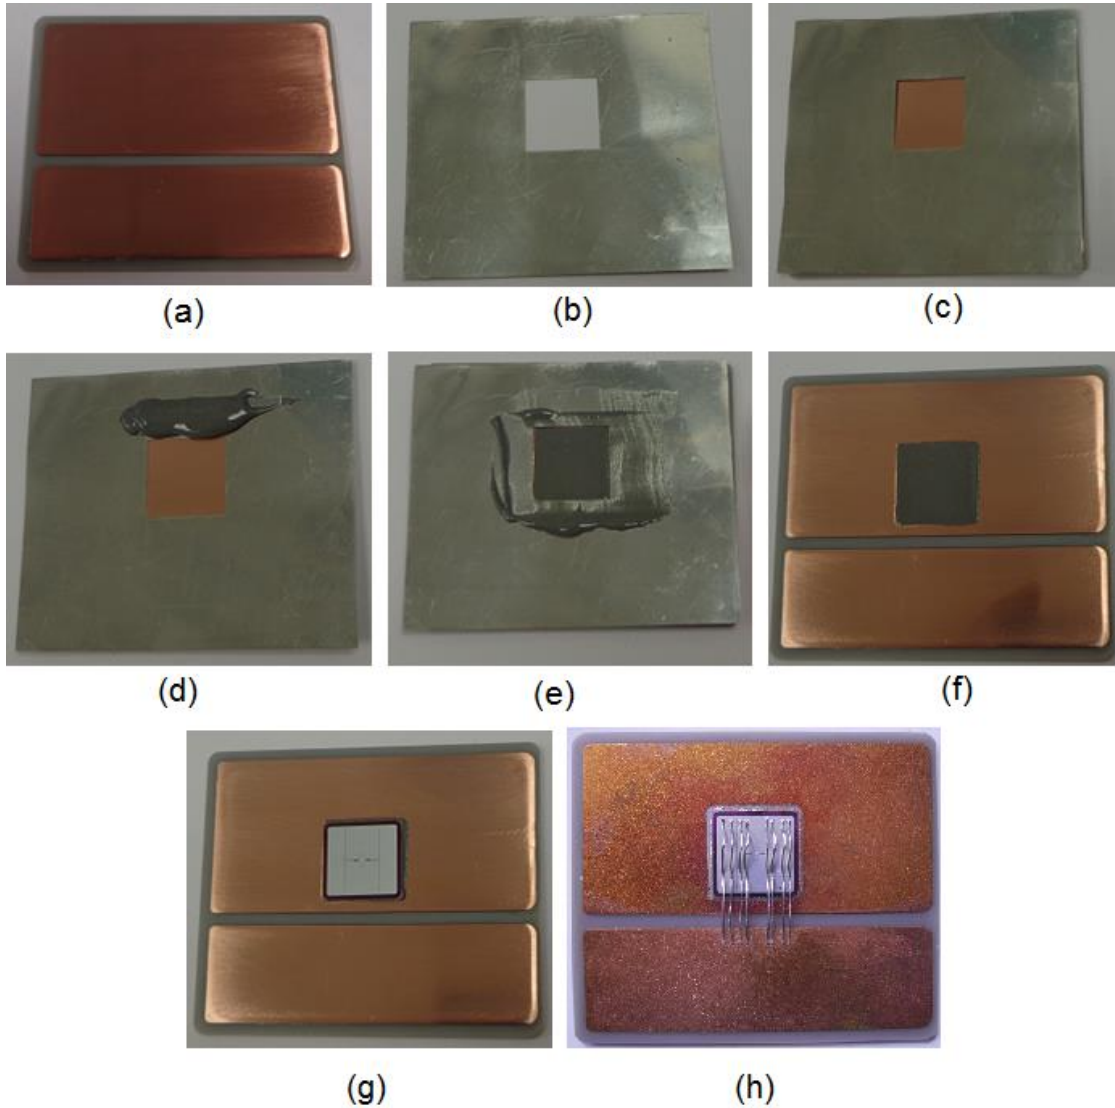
Sample preparation (a) two island DBC substrate (b) Aluminium mask (c) Mask placed on the substrate (d) Solder paste applied to the mask (e) Solder paste spread using squeegee (f) mask removed from the substrate (g) IGBT placed over the solder paste (h) finished test vehicle after passing through reflow oven and wirebonding process.
